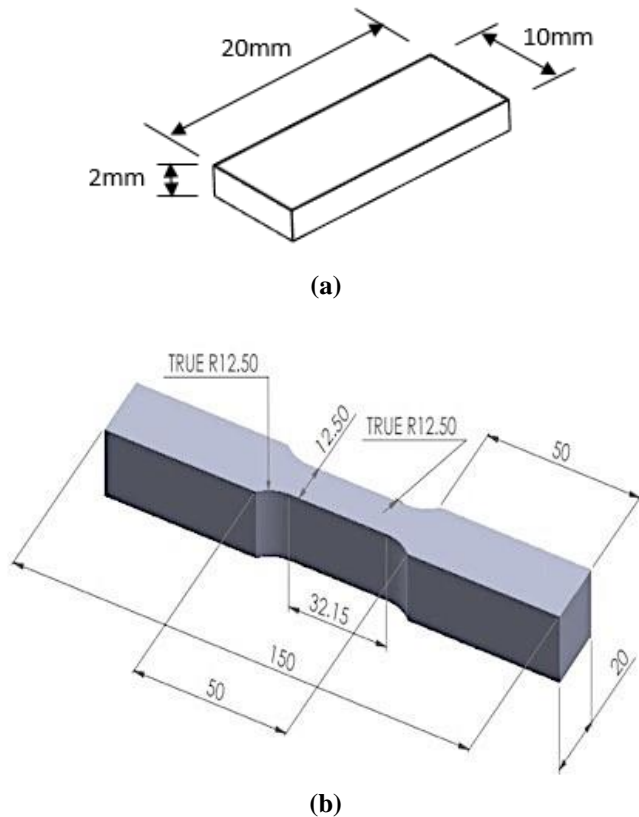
Dimensions of (a) hardness and materials analysis and (b) tensile test sample (unit: mm)
